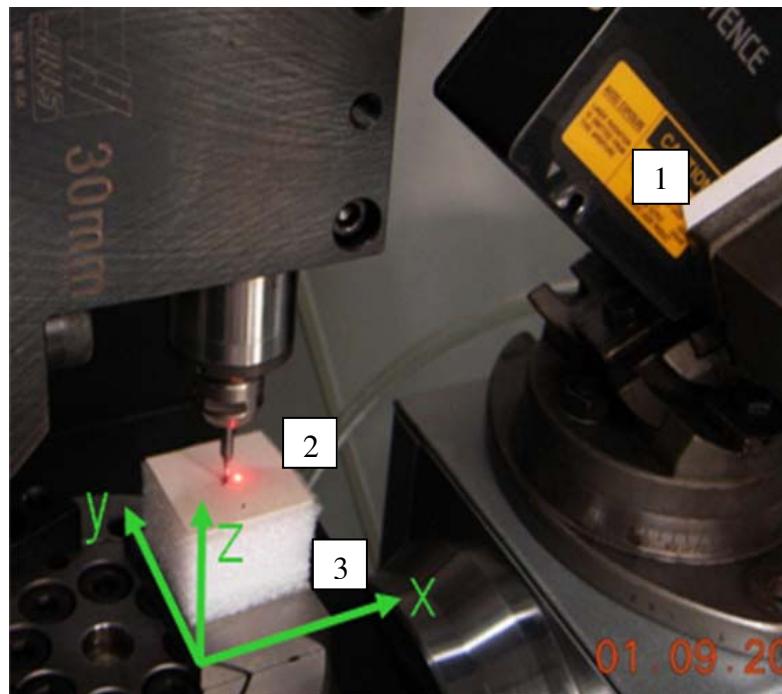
Setup showing the Keyence laser and cutting tool for tool positioning in z-direction. 1: Keyence laser, 2: Cutting tool and 3: Workpiece.
